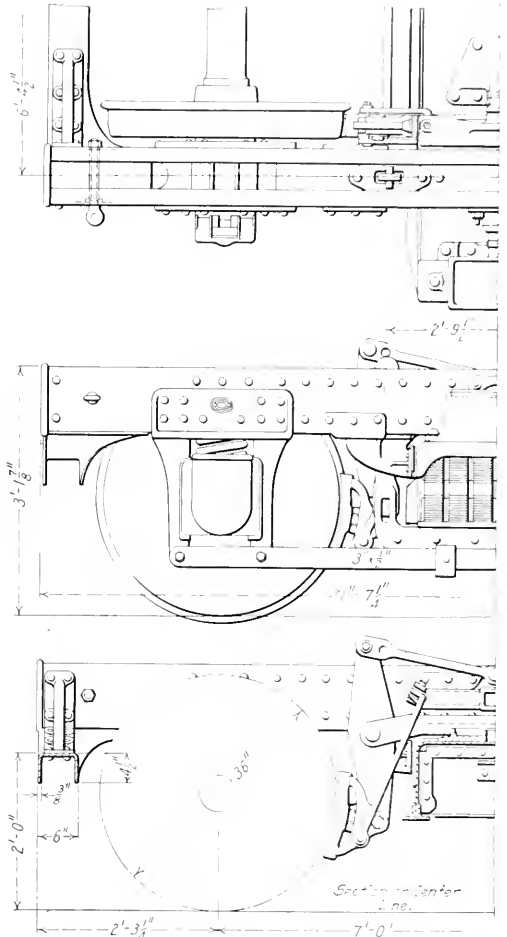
One End of Original Four-Wheel Steel Passenger Car Truck Before the Application of the Clasp Brakes; Pennsylvania Railroad
